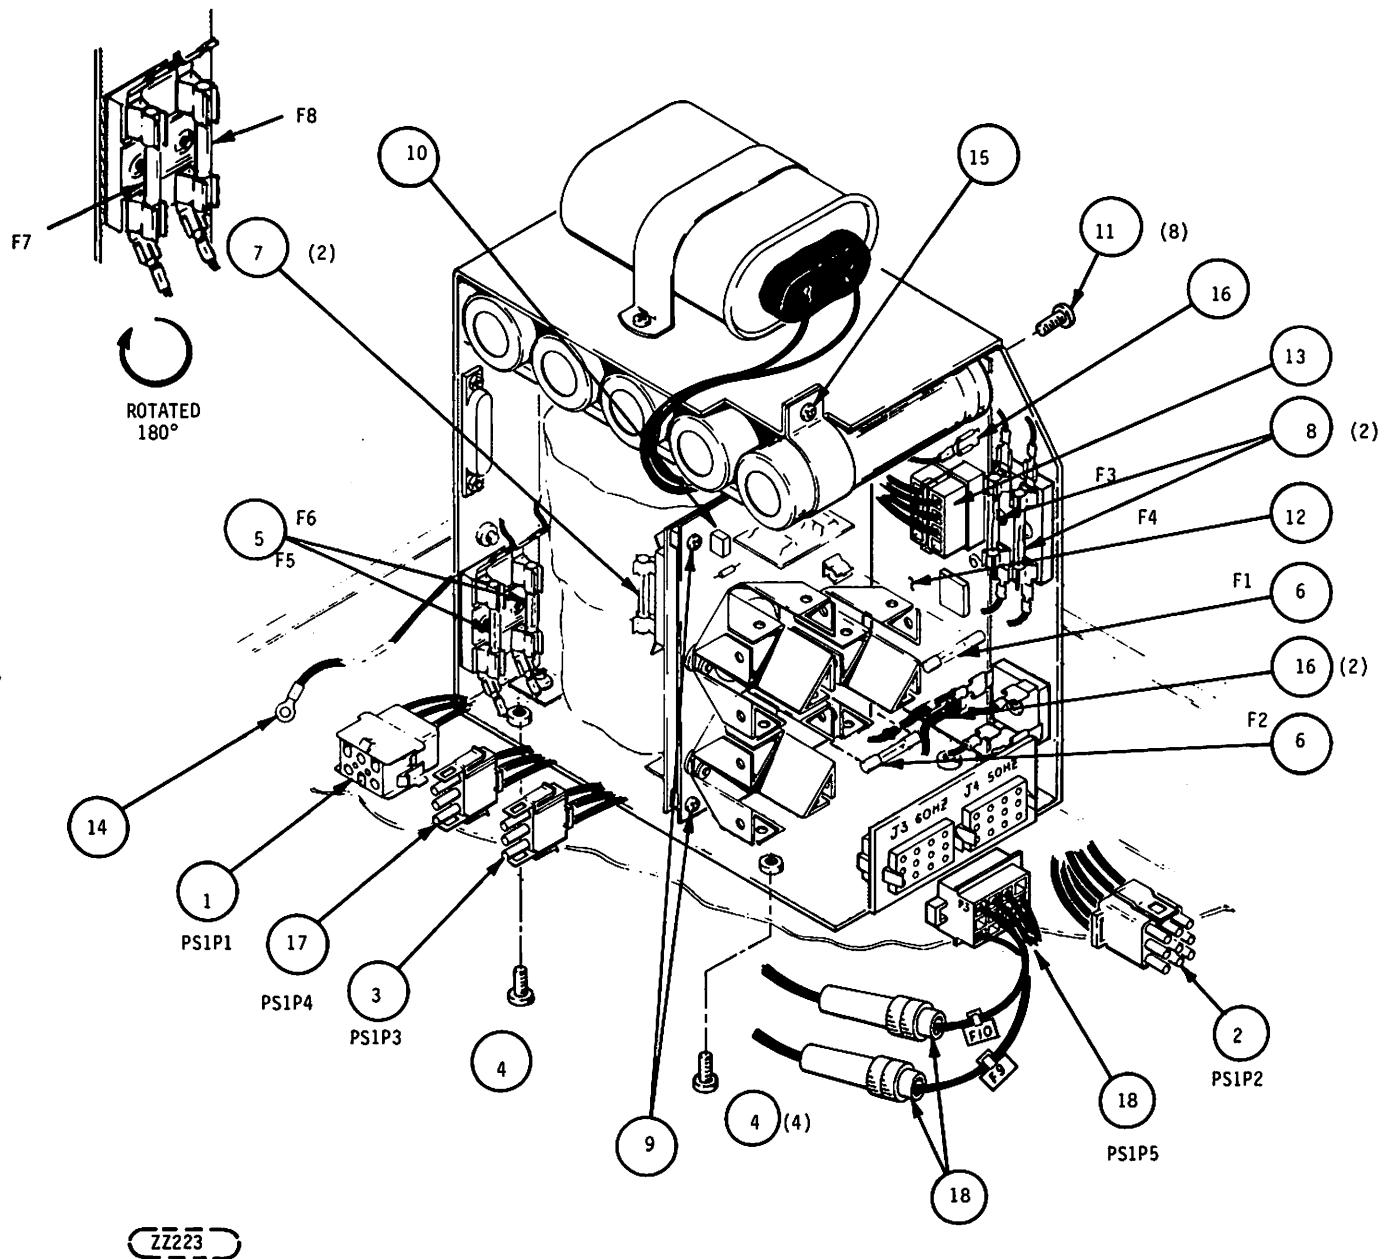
50/60 HZ POWER SUPPLY ASSEMBLY
